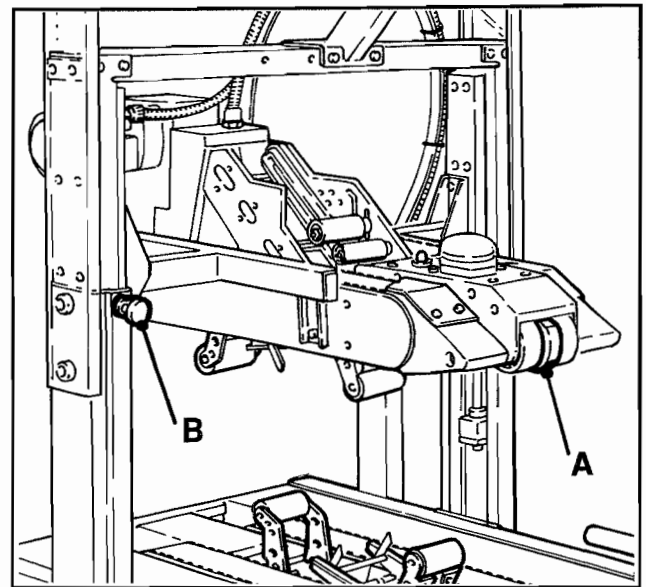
Latching Knob, Upper Taping Head Frame
